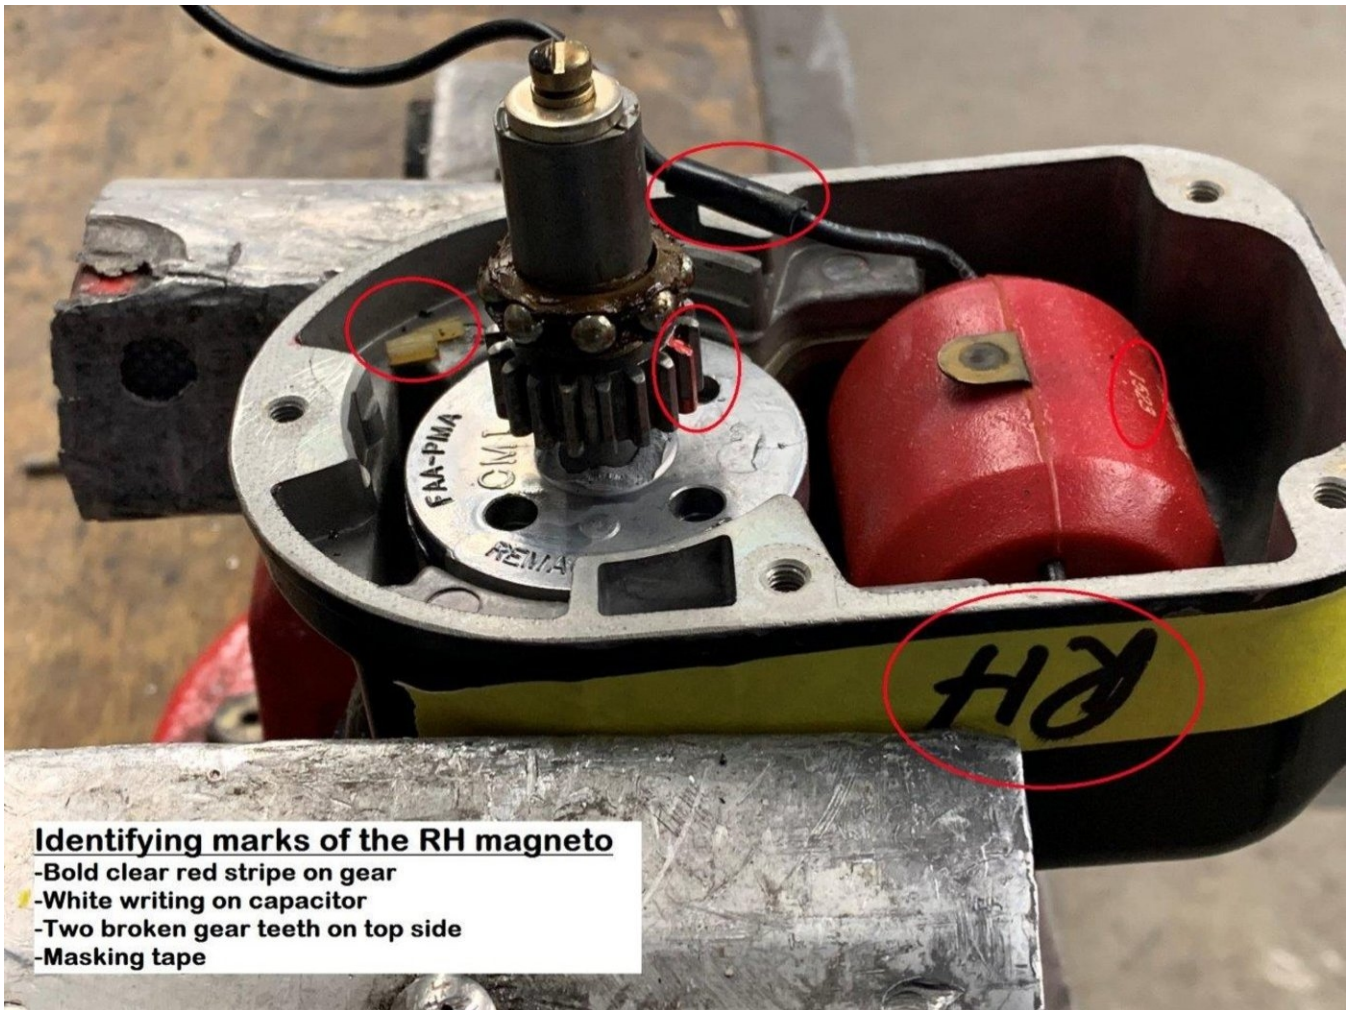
View of Right Magneto During Disassembly (courtesy Myers Aviation)
